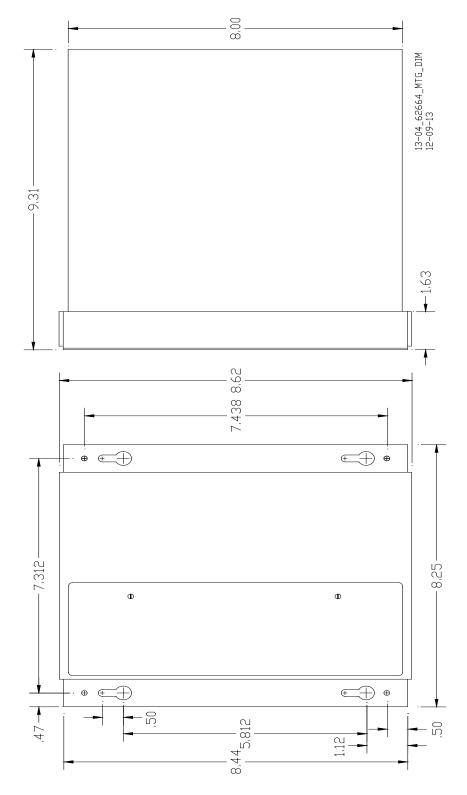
Bidirectional Simulation Coupler Assembly Mounting Dimensions
